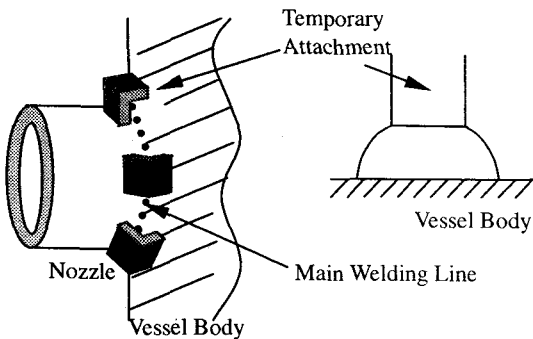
Schematic drawing of weldment of L-type temporary attachments around nozzle
